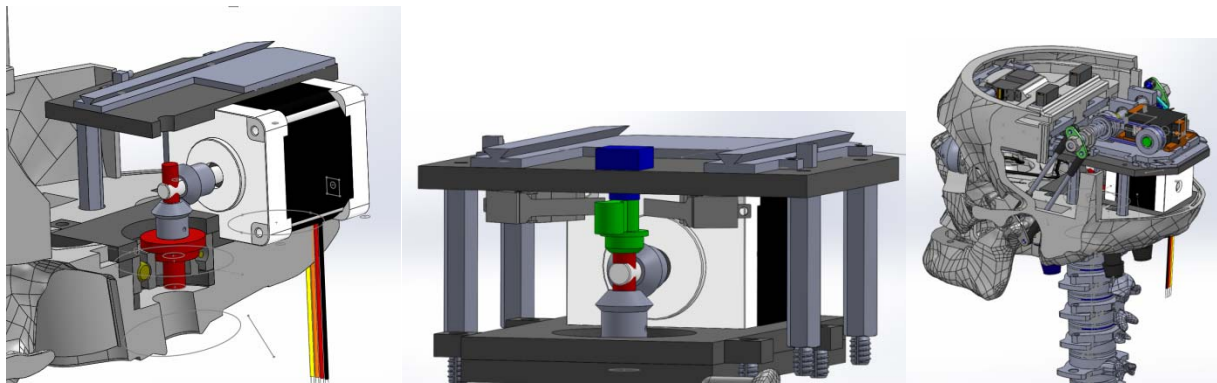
Head motion stepper motor and bevel gear linking motor shaft (model shaft is longer than real shaft) and upper fitting of flexible shaft (red); positioning of limit switches and potentiometer relative to flexible shaft axis; partial cut-away view of jaw motion and head motion mechanisms, also showing servos for blinking and proptosis motion.
